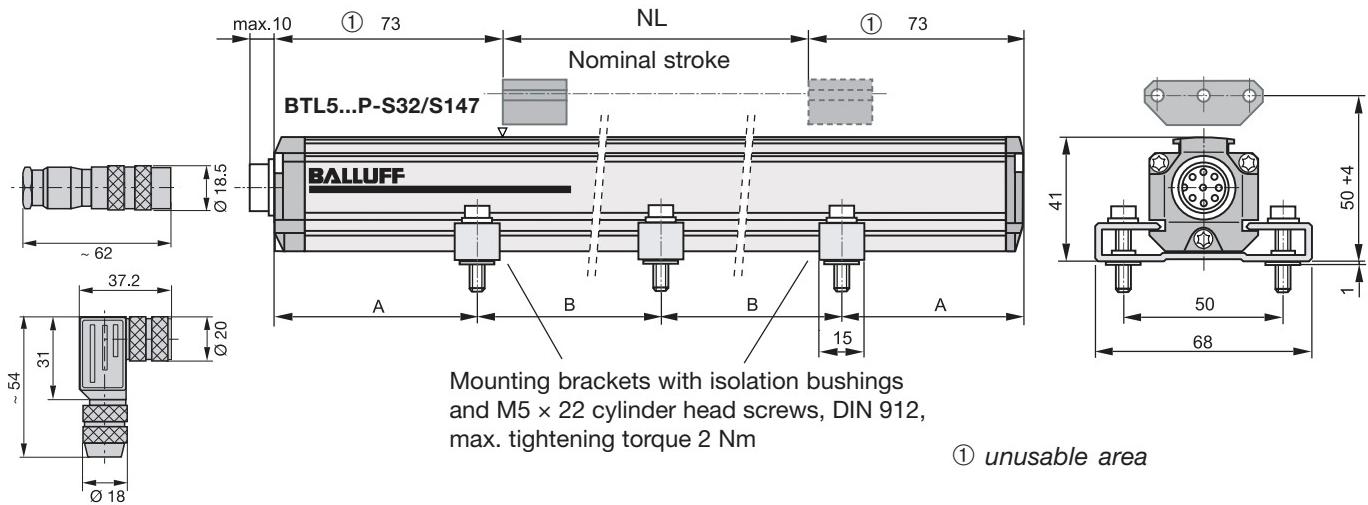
Dimensional drawing (BTL5...P-... transducer with floating magnet BTL5-P-3800-2)
